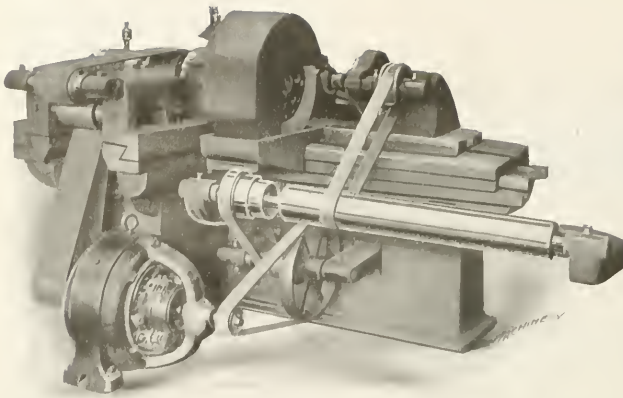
Rear View of Machine shown in Fig. 1, equipped for Individual Motor Drive
